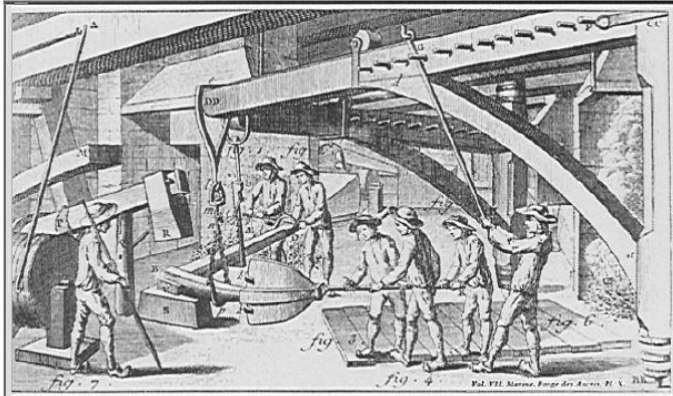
Woodcut showing a large ship's anchor being forged in 18th century France. The arm and the shaft of the anchor are being forge-welded together in this view.
